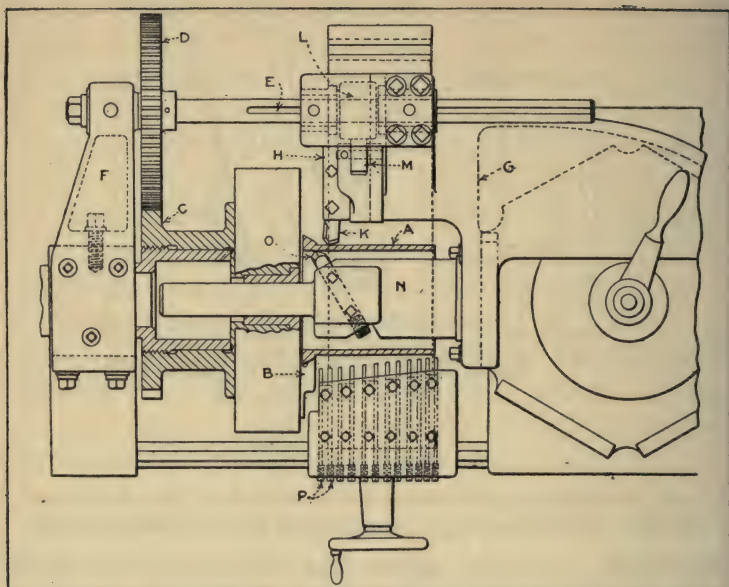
ECCENTRIC TURNING DEVICE FOR PACKING RINGS
